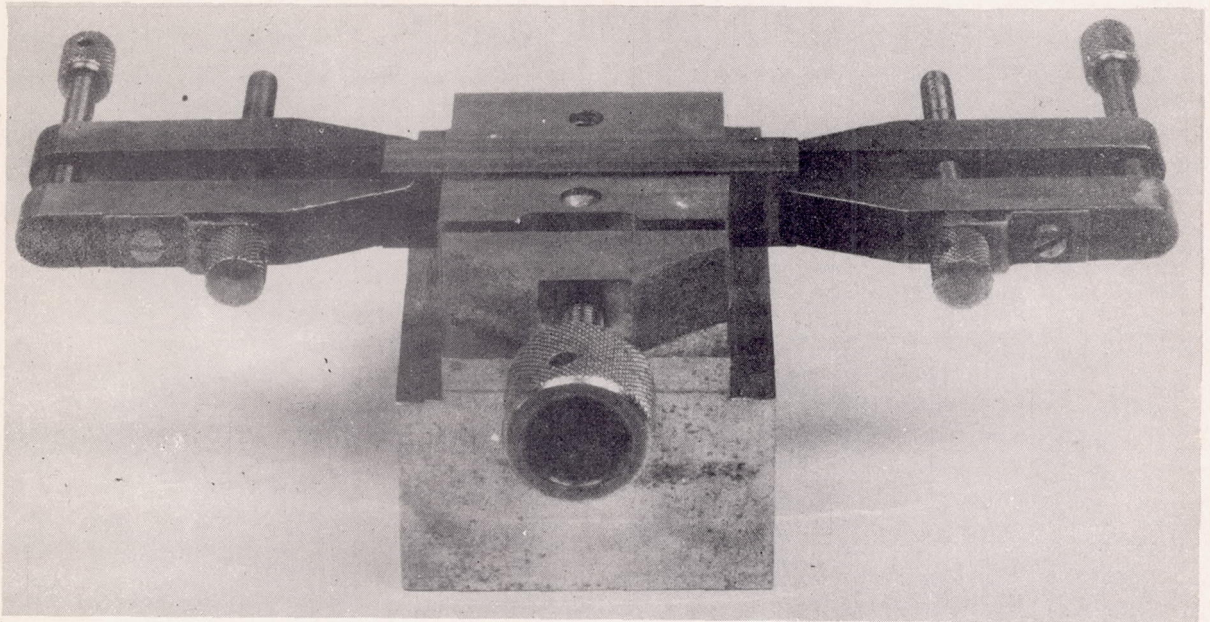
Pack of specimens in machining fixture ready for grinding one side.
